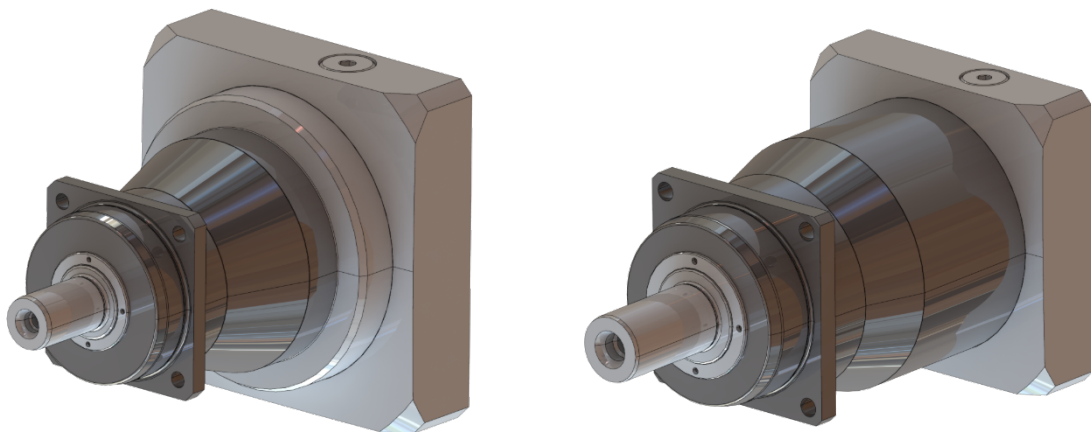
3D CAD Model of Gearboxes (Y-Axis, left | Z-Axis, right)
